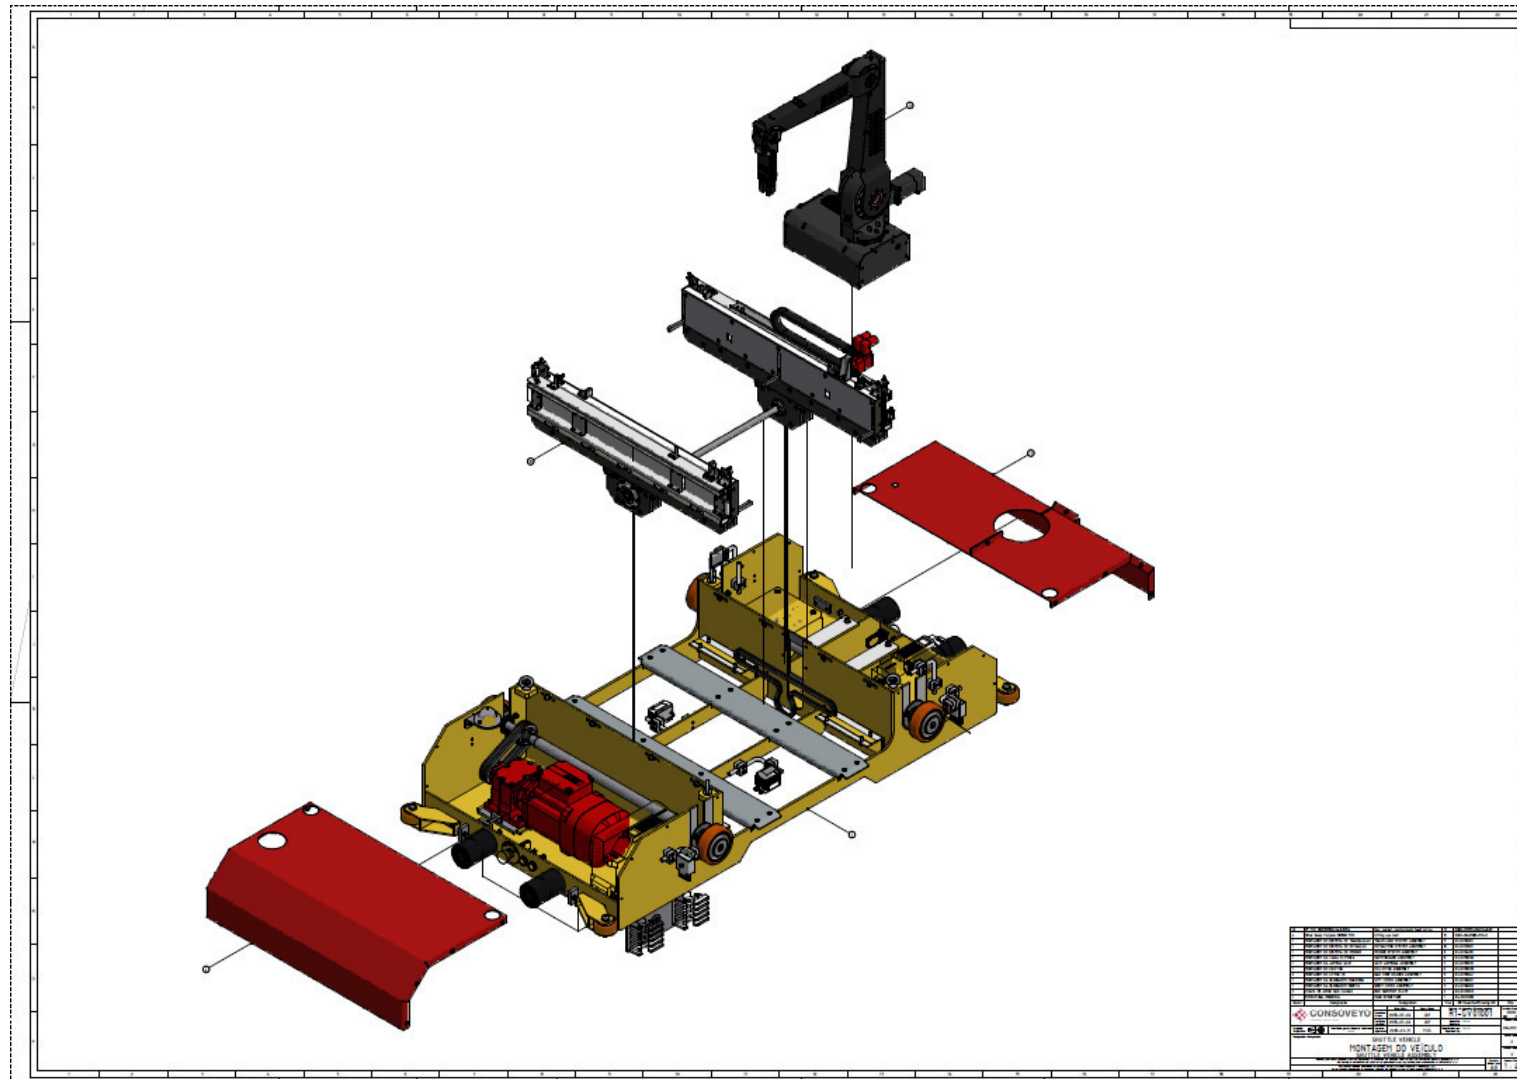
Main assembly drawing of the shuttle vehicle (sheet 2/2).
